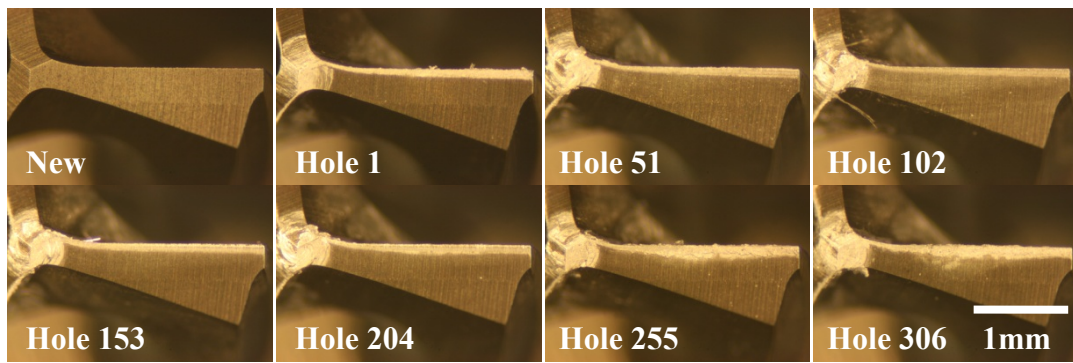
Tool wear micrographs of Dymon-iC™ drill under 3bar cutting fluid, 260m/min cutting speed (Test 6)
